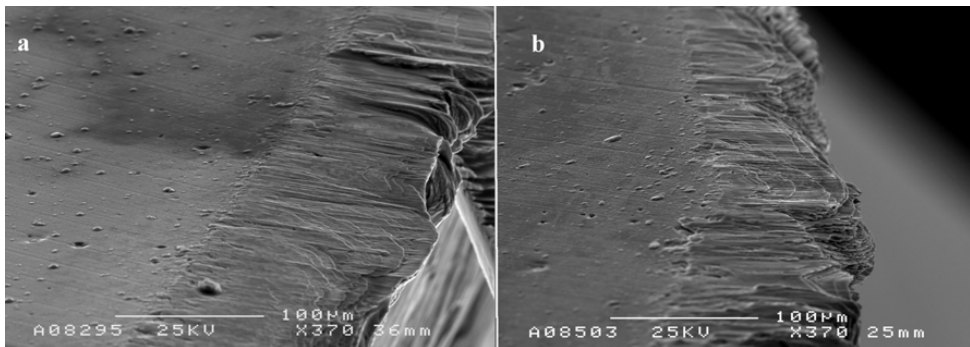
(a) The cutting edge of a solid carbide drill using a feed rate of 0.1 mm/rev. with external cutting fluid supply and (b) the cutting edge with a feed rate of 0.1 mm/rev. and internal cutting fluid supply
